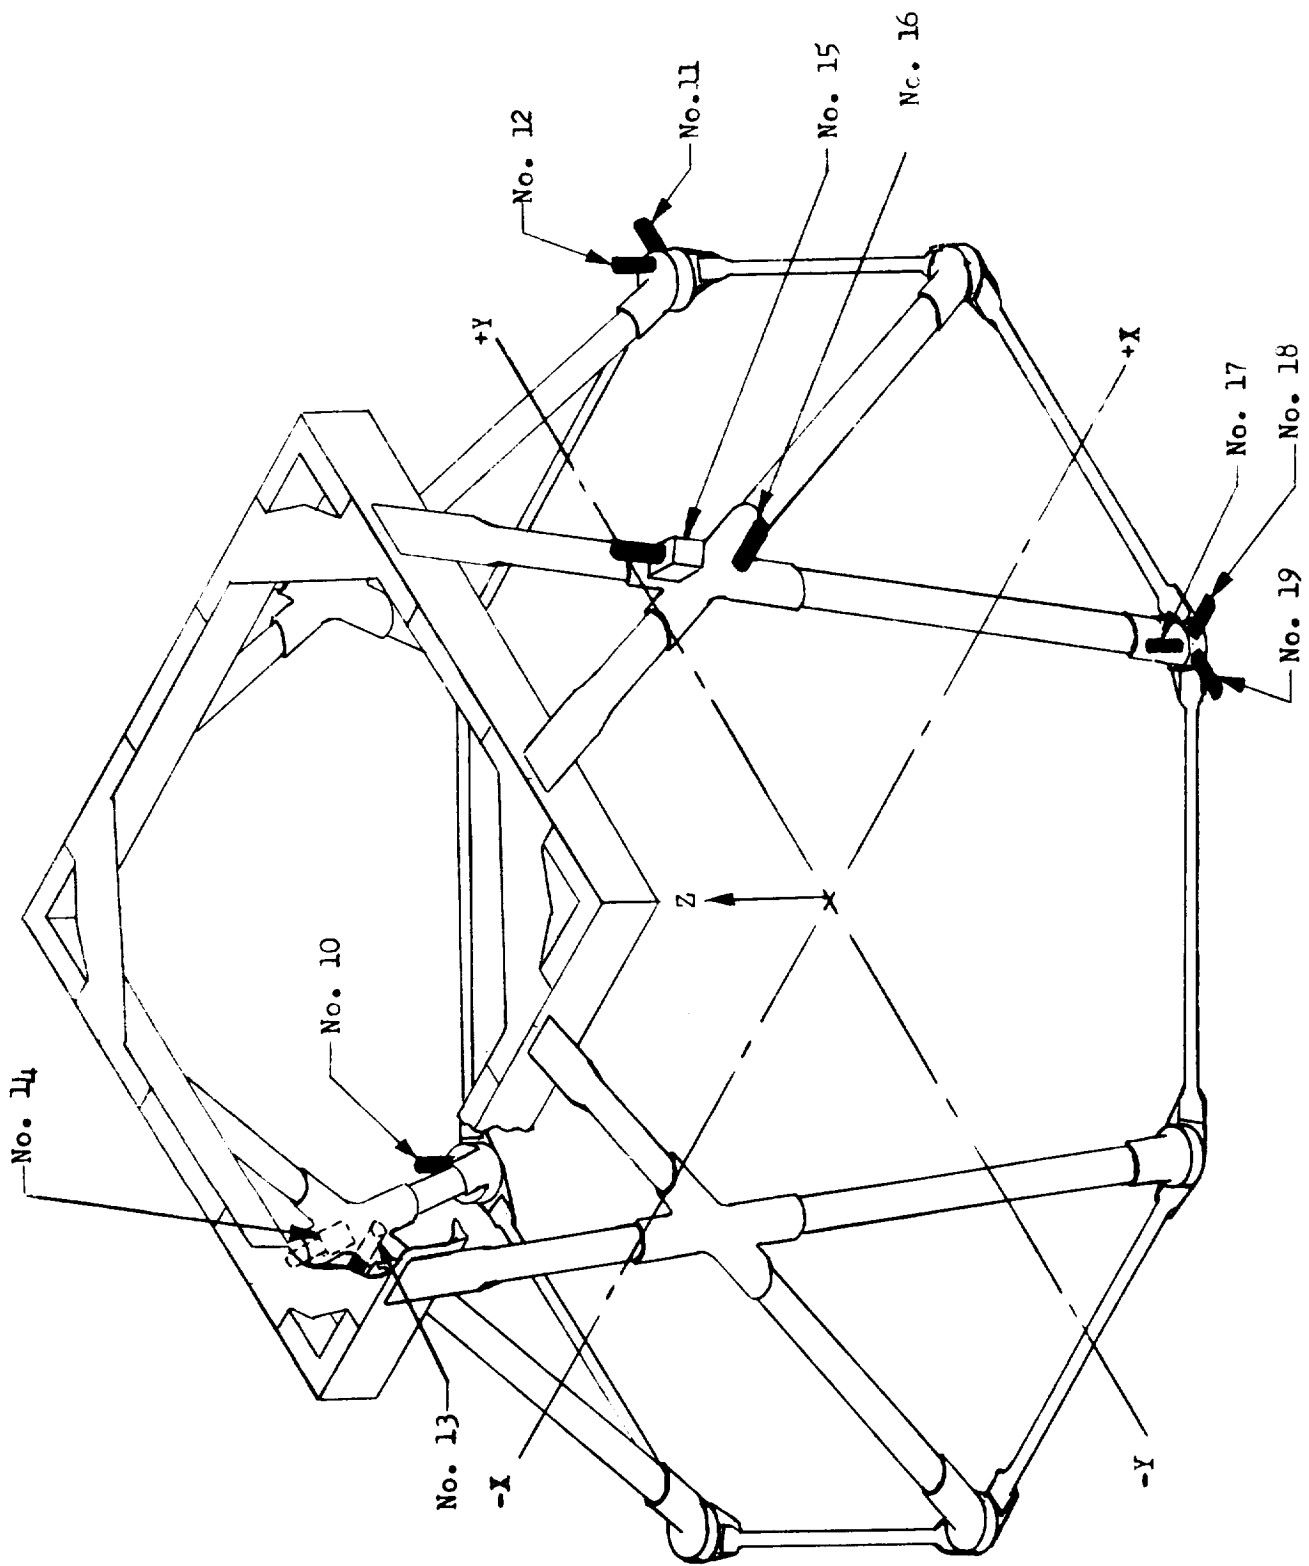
Accelerometer Locations on Strut Assembly
